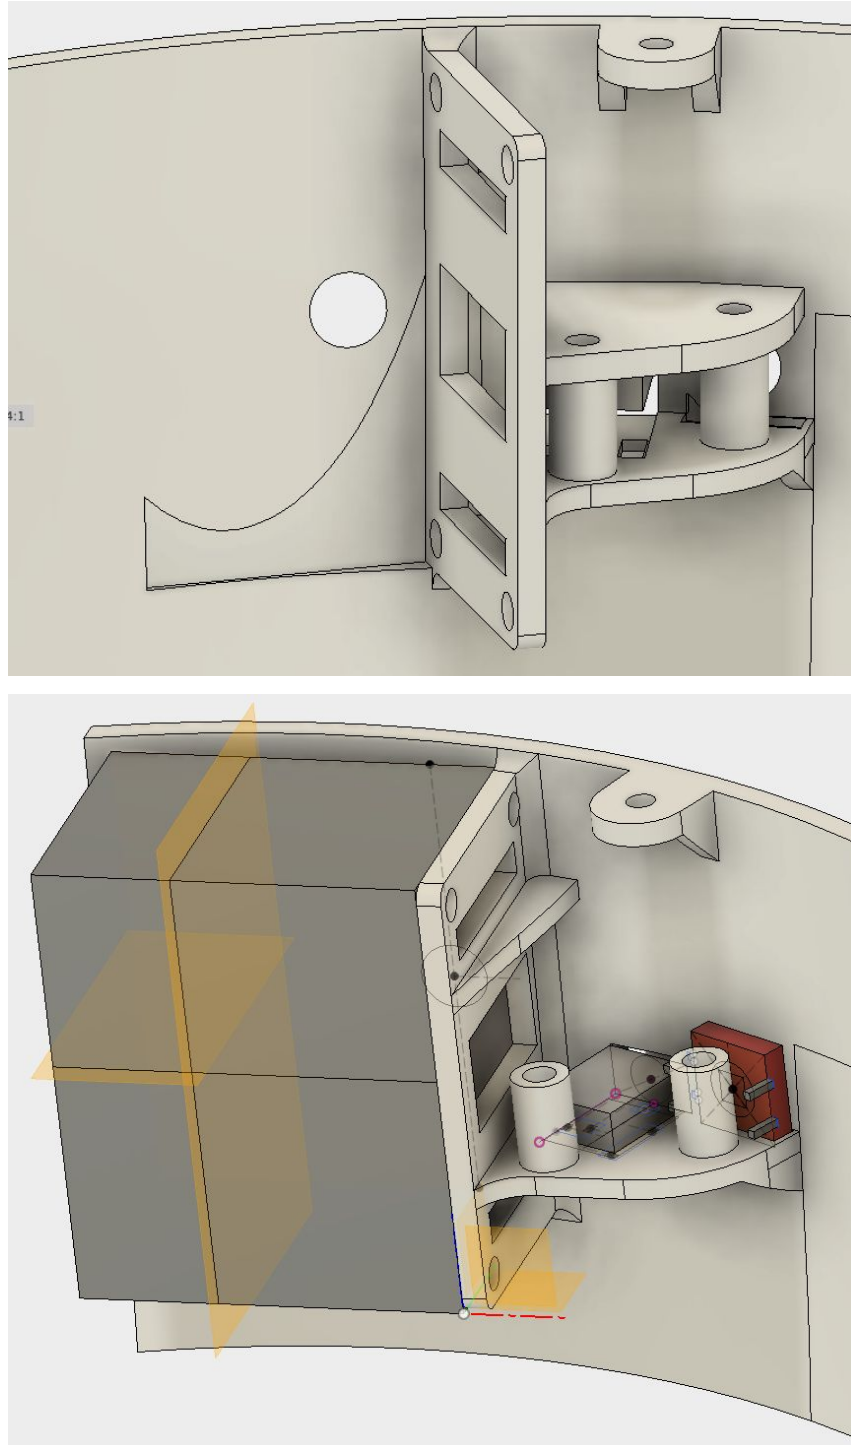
Vertically-mounted electronics shelf with side shelf with separable top (top). Components added to show electronics installation with enclosing top removed (bottom).
